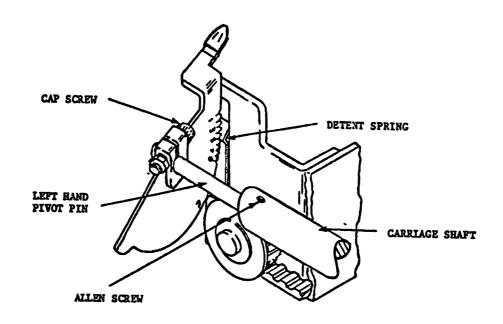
HEAD ADJUSTMENT ARM ASSEMBLY
